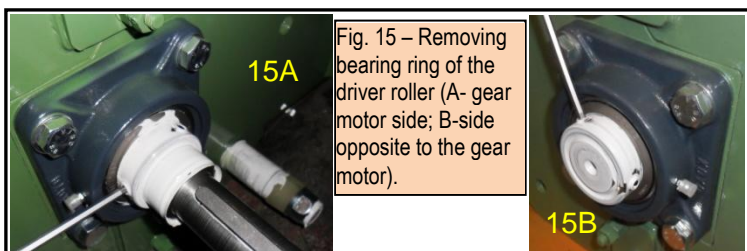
Removing bearing ring of the driver roller (A- gear motor side; B-side opposite to the gear motor).
